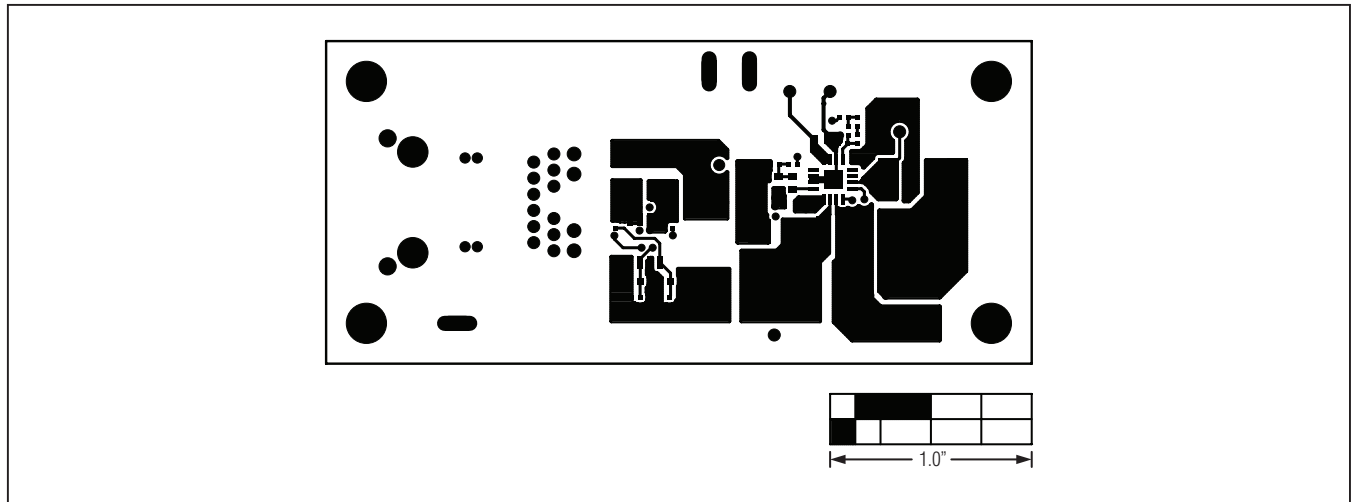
MAX5986A EV Kit PCB Layout—Component Side
